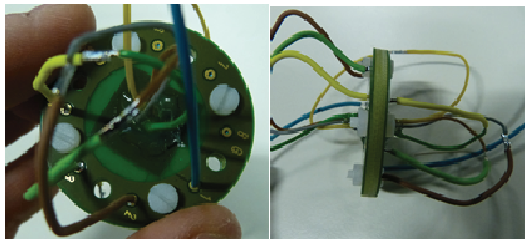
Car-key energy harvester prototype assembly (layout type A as example)
